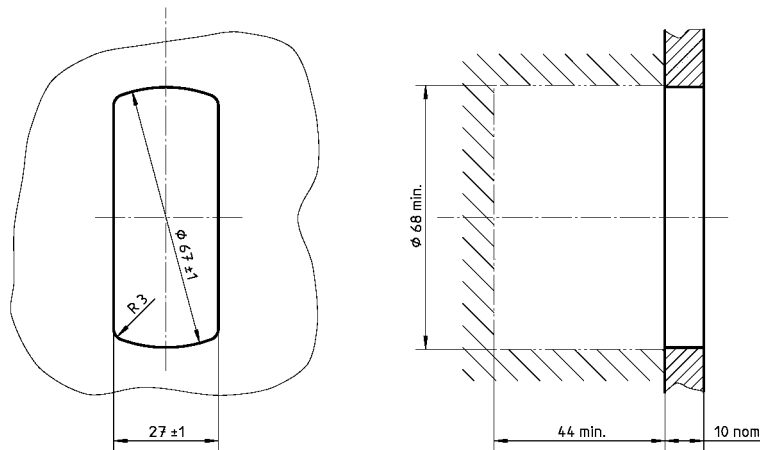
Location of sockets for clip-on equipment to 40 and 42 type containers, mm:
